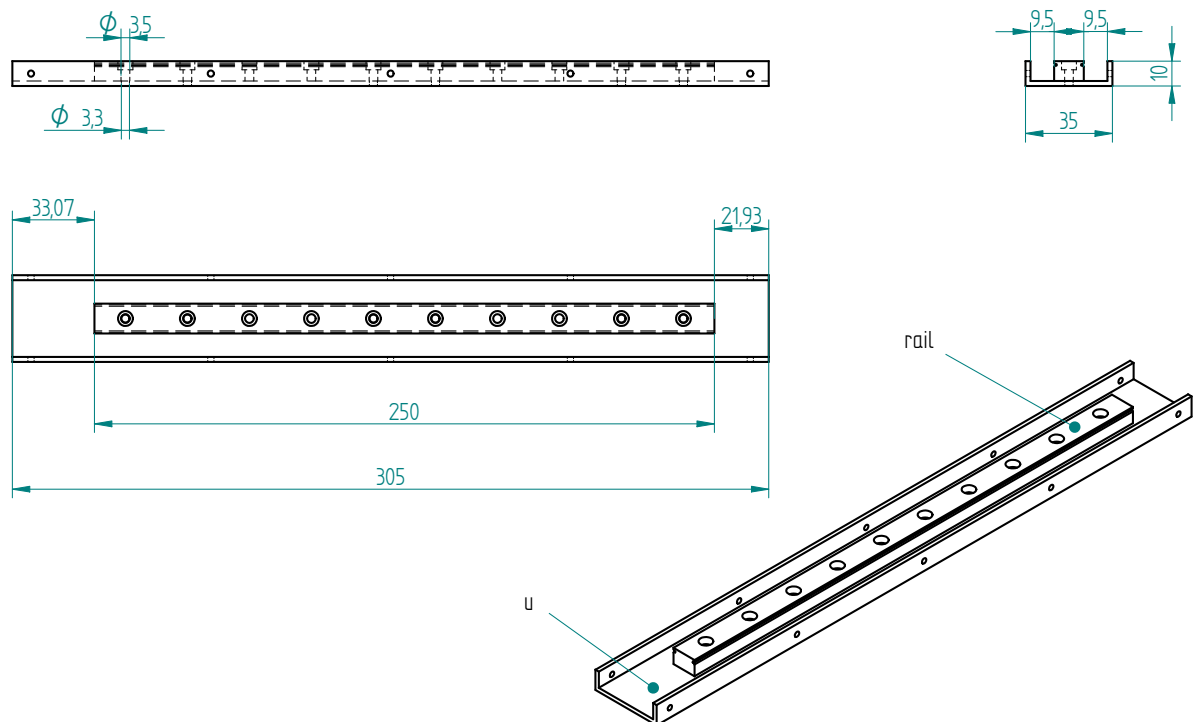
Center punch the 3.3 mm hole through the rail using a 3.5 mm drill bit
